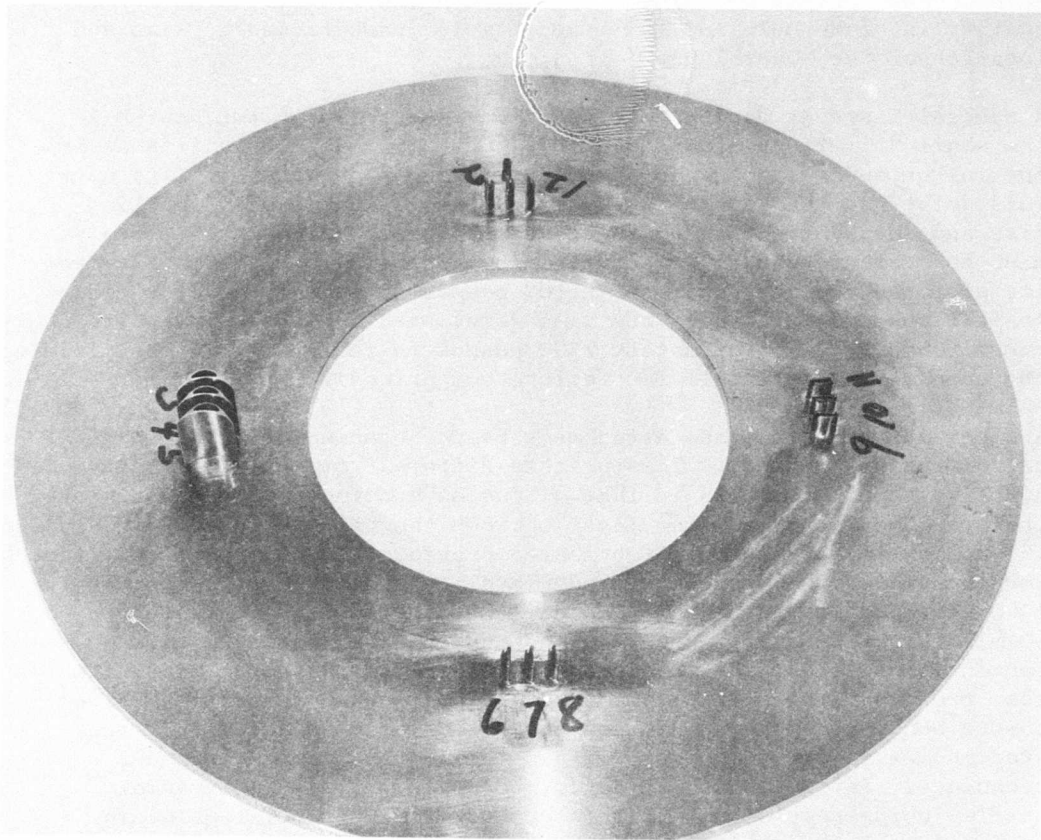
Assembly of Several Hollow Blades on Shear Lugs.
